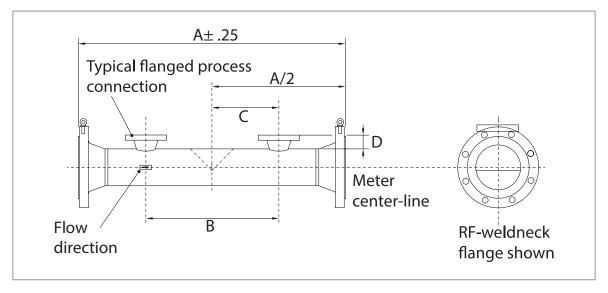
Tek-DP 1670A With Flanged Tapping's and RFWN End Flanges (4" to 24")
